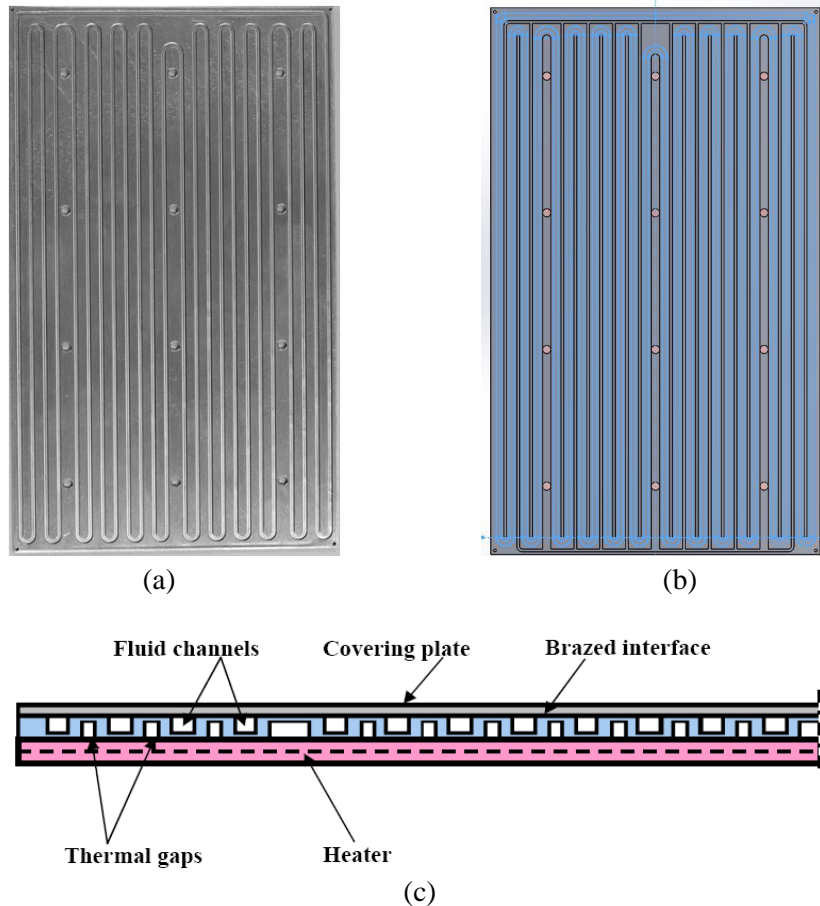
View of the FPPHP: (a) photograph of the machined channel; (b) schematic view of the separating grooves on the back face and (c) half-sectional view.
